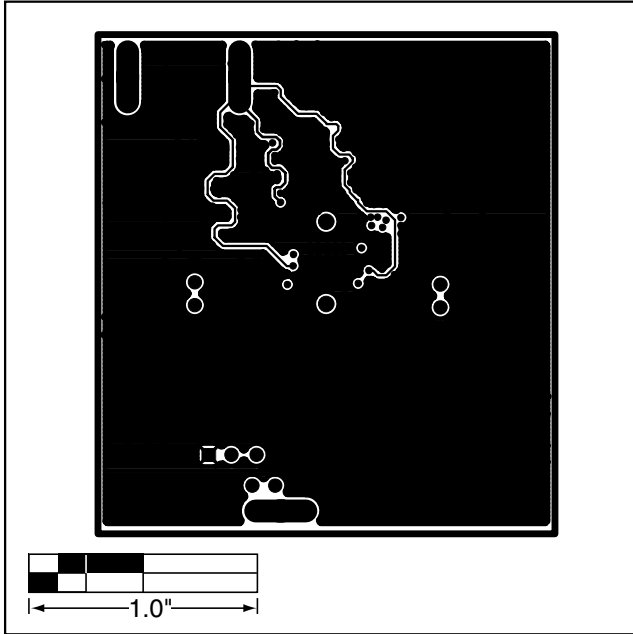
MAX2720/MAX2721 EV Kits PC Board Layout—Power Plane (Layer 3)
